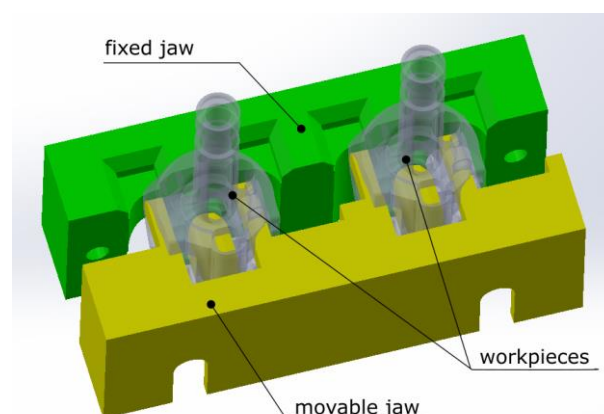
The first version of the fixture for clamping workpiece on milling machine
